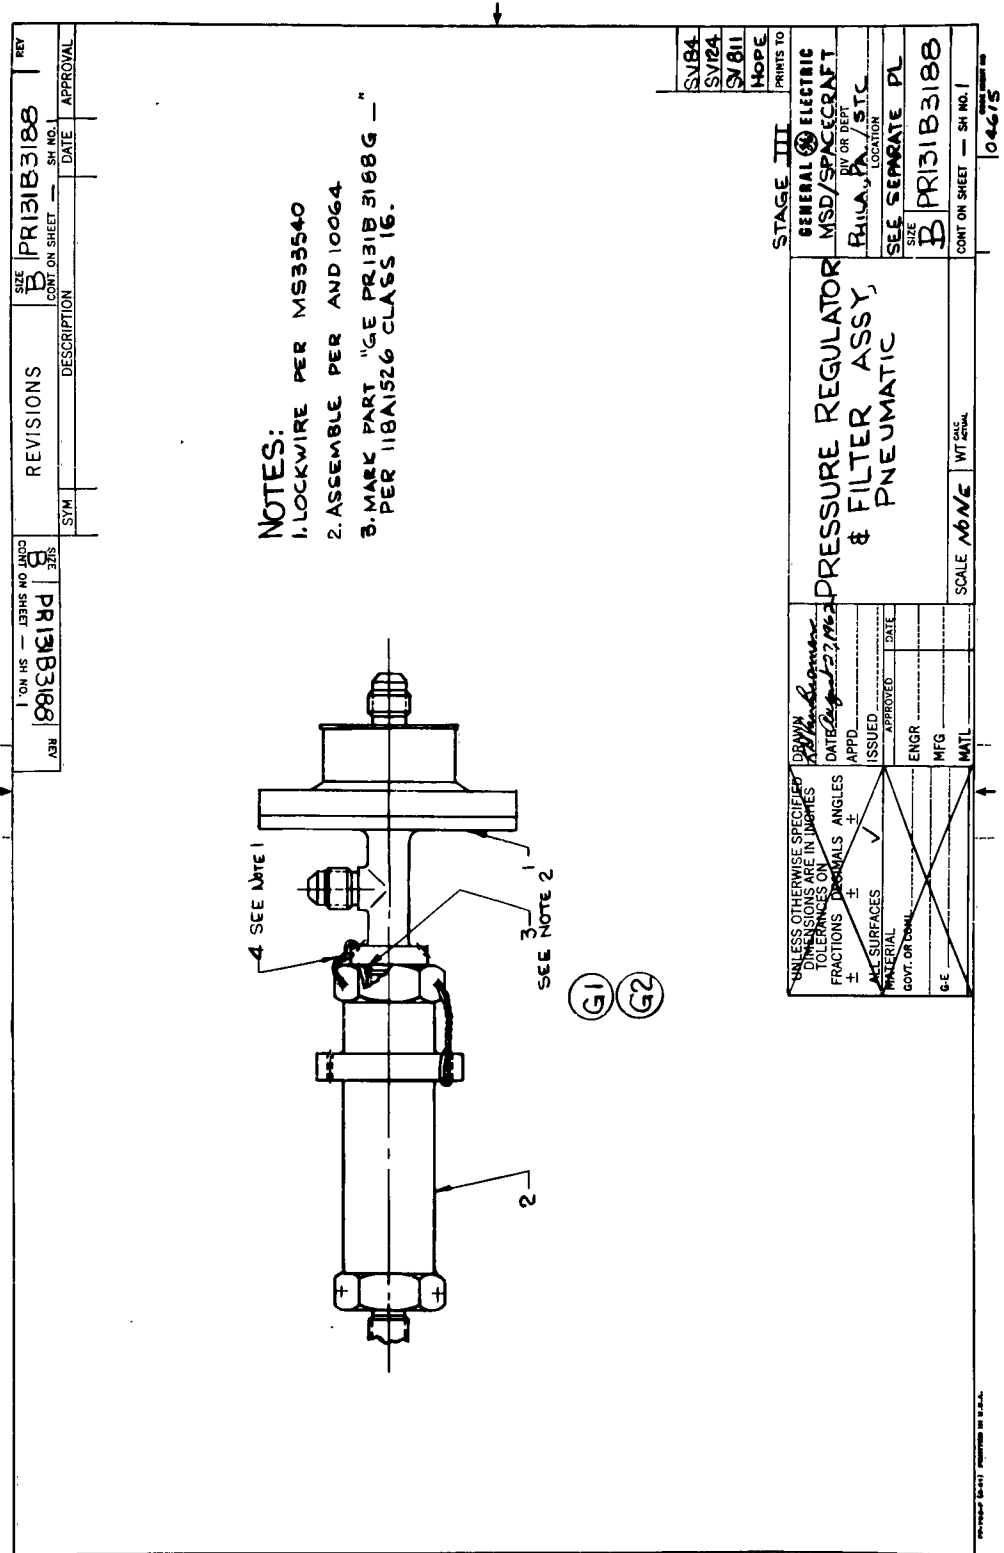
A5. Pressure Regulator and Filter Assembly, Pneumatic
